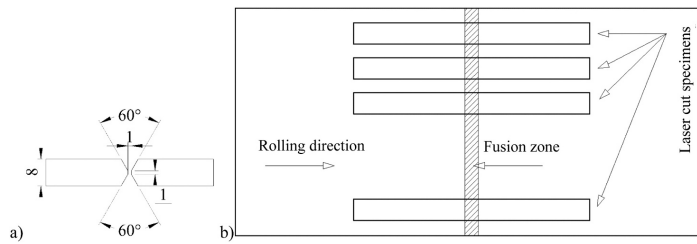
Specimen preparation, (a) the butt-welded configuration (b) schematic of the butt-welded workpiece and the laser-cut sections. (Dimensions are in mm, not to scale).
